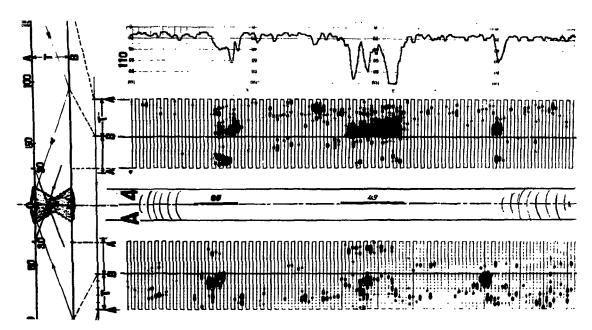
Example of 2-dimensional display chart of weld defects.
